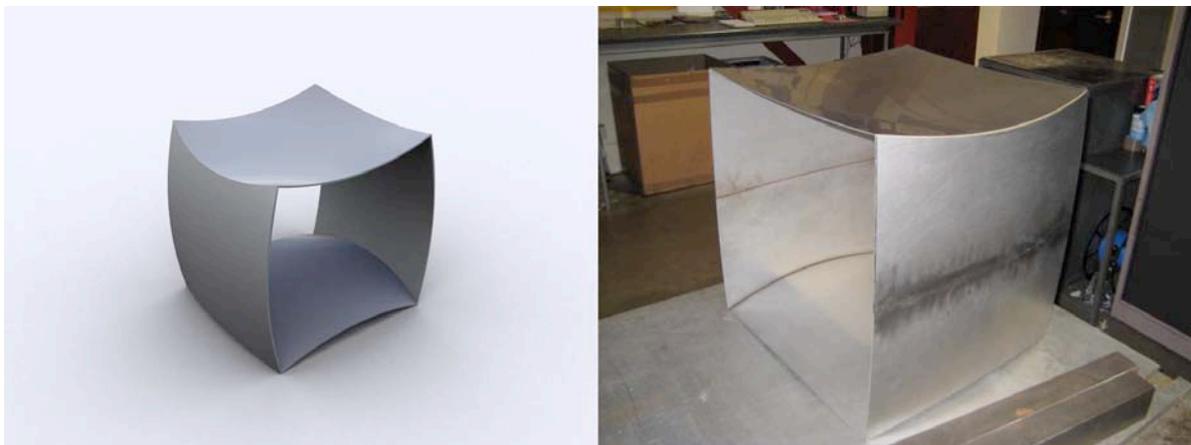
Stool project with designer Neil Parsons and Carr's Welding.
